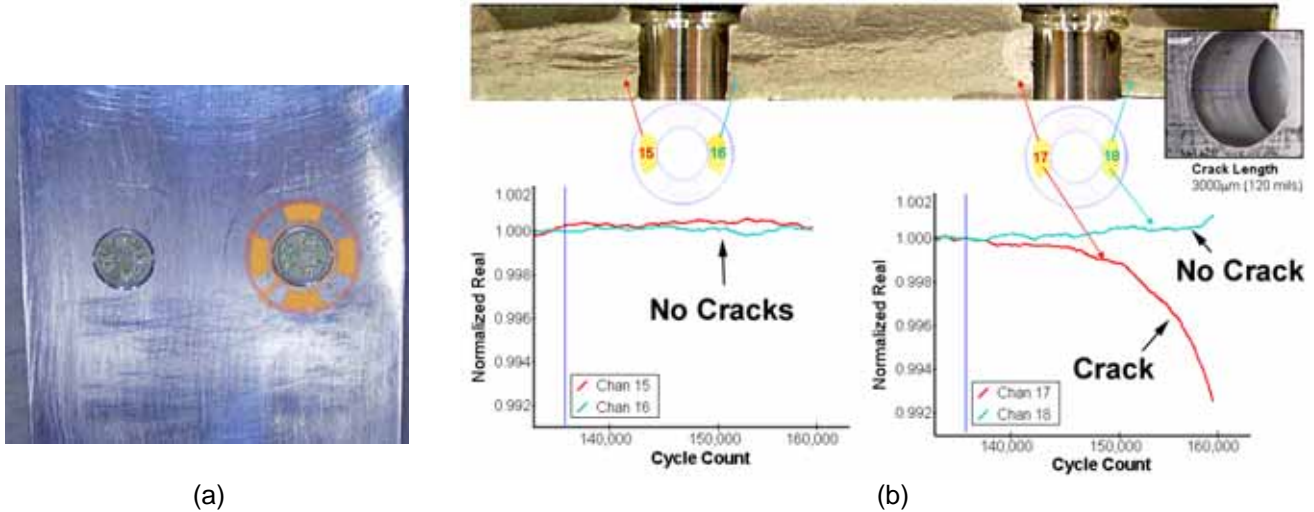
(a) Schematic of an MWM-Array FA80 sensor superimposed on a photograph of an aluminum fatigue specimen with fasteners. (b) Test results showing the detection of buried cracks formed during a fatigue test of an Al7075 specimen with fasteners in the holes. Also shown are photographs of a fatigue crack on a fracture face and of the crack on the internal surface of the hole prior to fractography.
